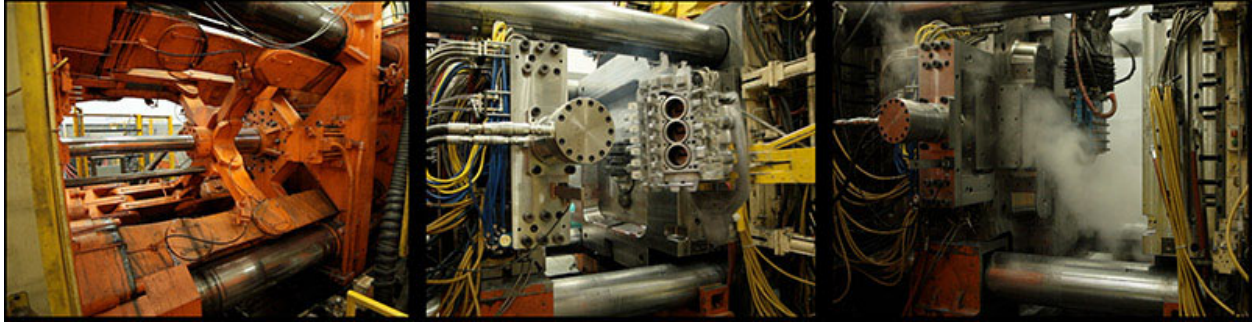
Exco Engineering is a world leader in advanced cooling of die cast tools using printed metal inserts
